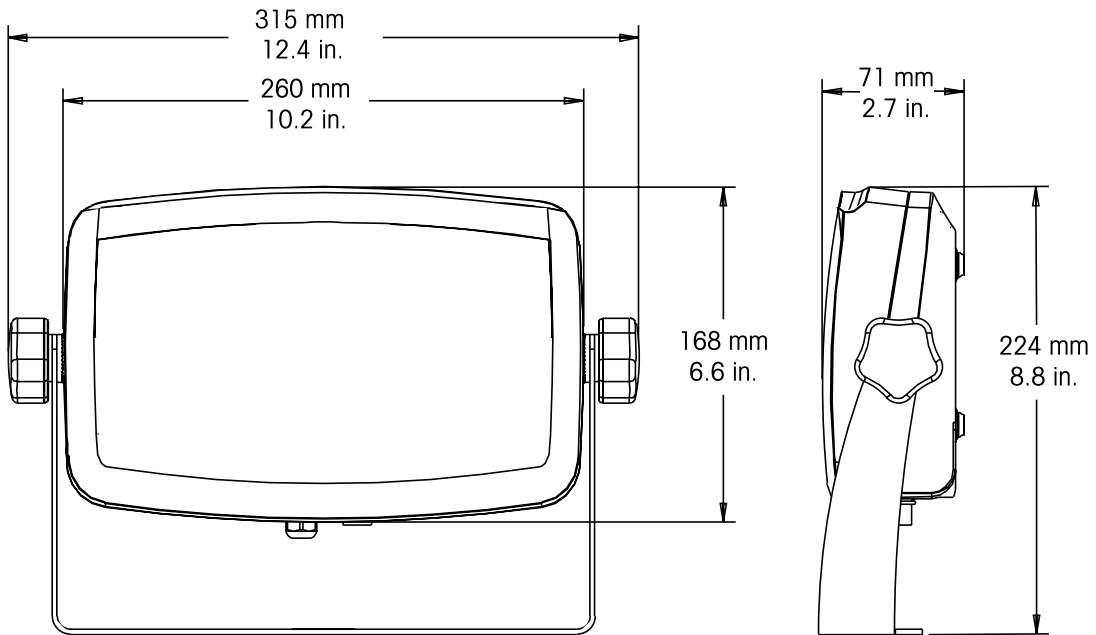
T51P Indicator Overall Dimensions with Mounting Bracket.
